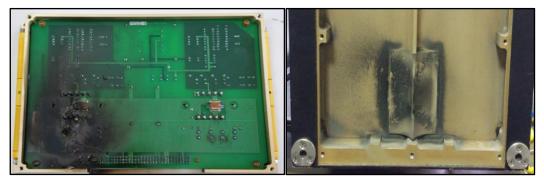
Burnt PCB Card of SAIU(left). Black Soot depositions in ECS ducting of LRU (Right)
